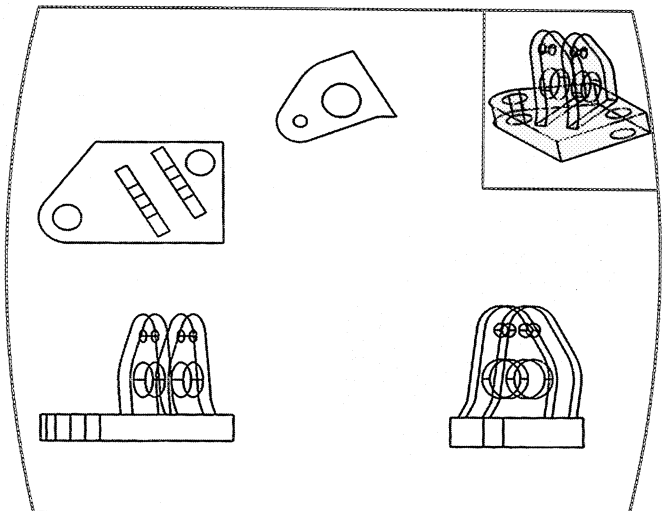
Partial Auxiliary View Projection Using 3D CAD
